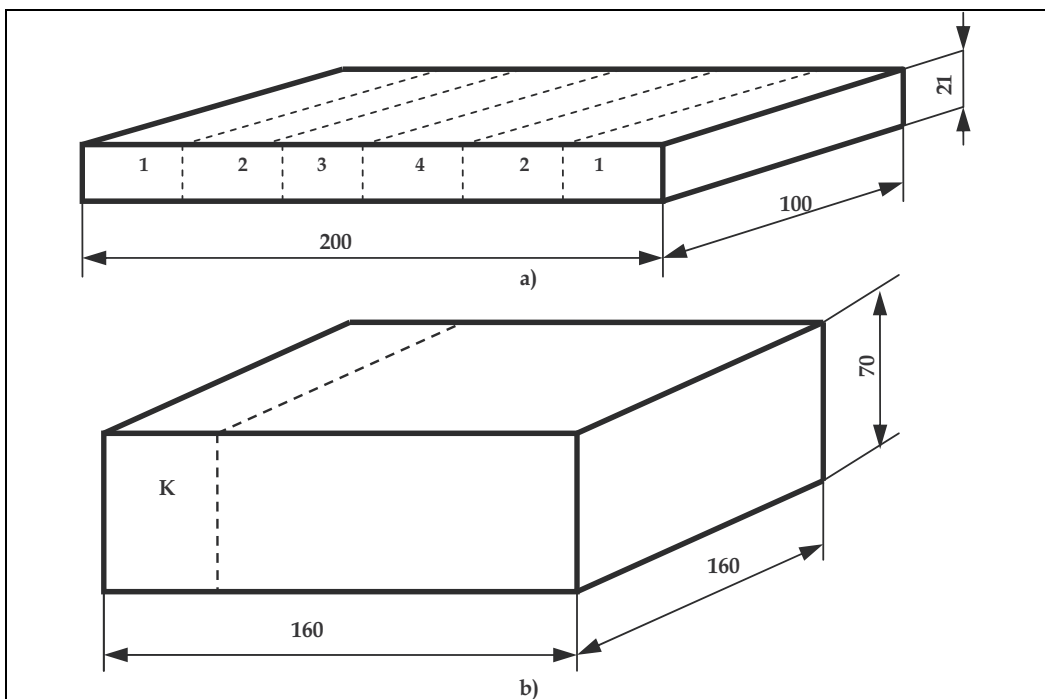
Taking, marking and using of specimens, a – plate, b – block
